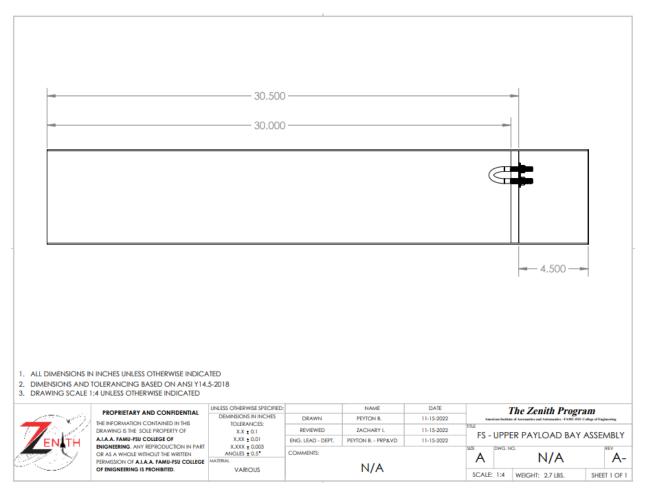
Upper Payload Bay Assembly CAD Drawing
